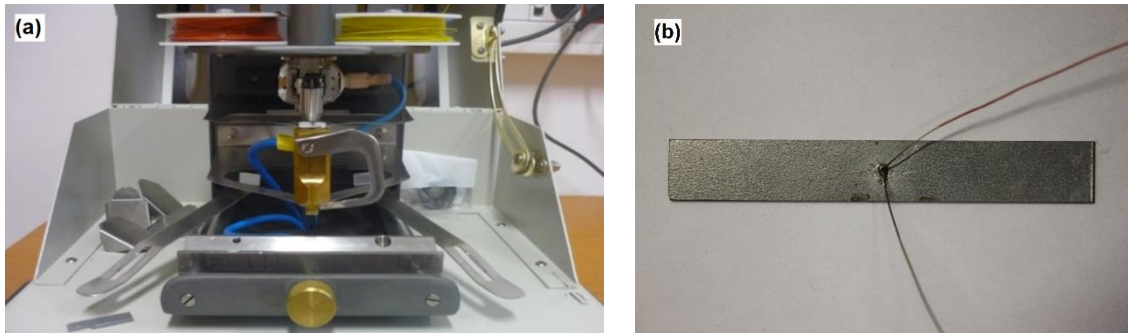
(a) Thermocouple welding machine and (b) sample with the welded thermocouples
